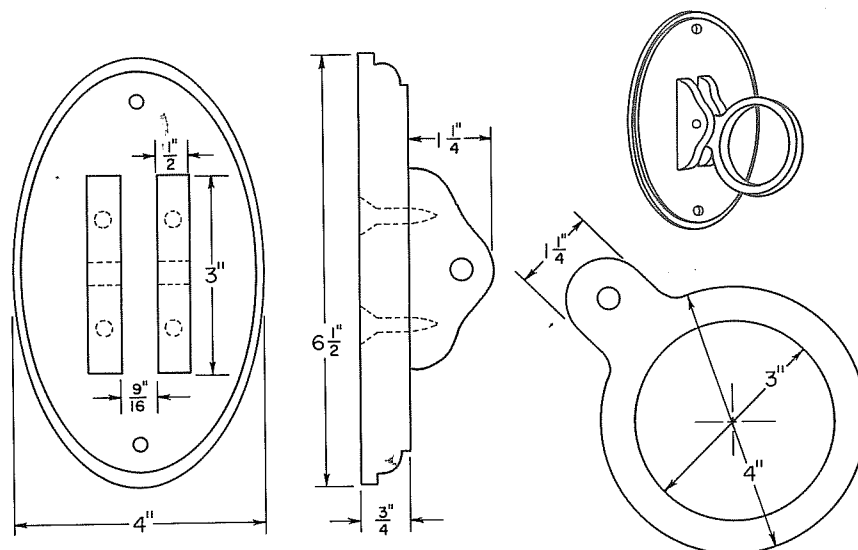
This multiview drawing is made from a sketch of a towel ring.
